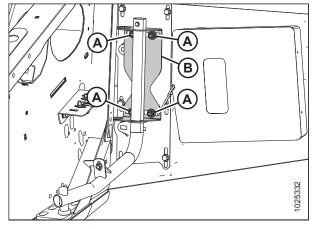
Left Endshield Support Tube on D1X Series Header
